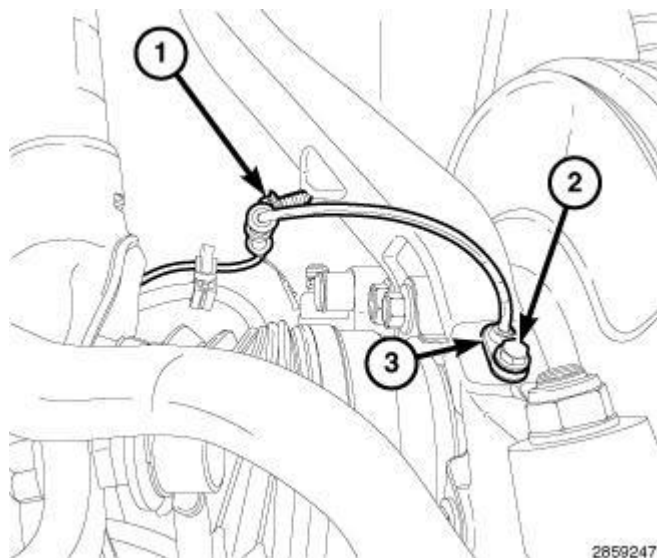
Front Wheel Speed Sensor, Retainers & Bolts
